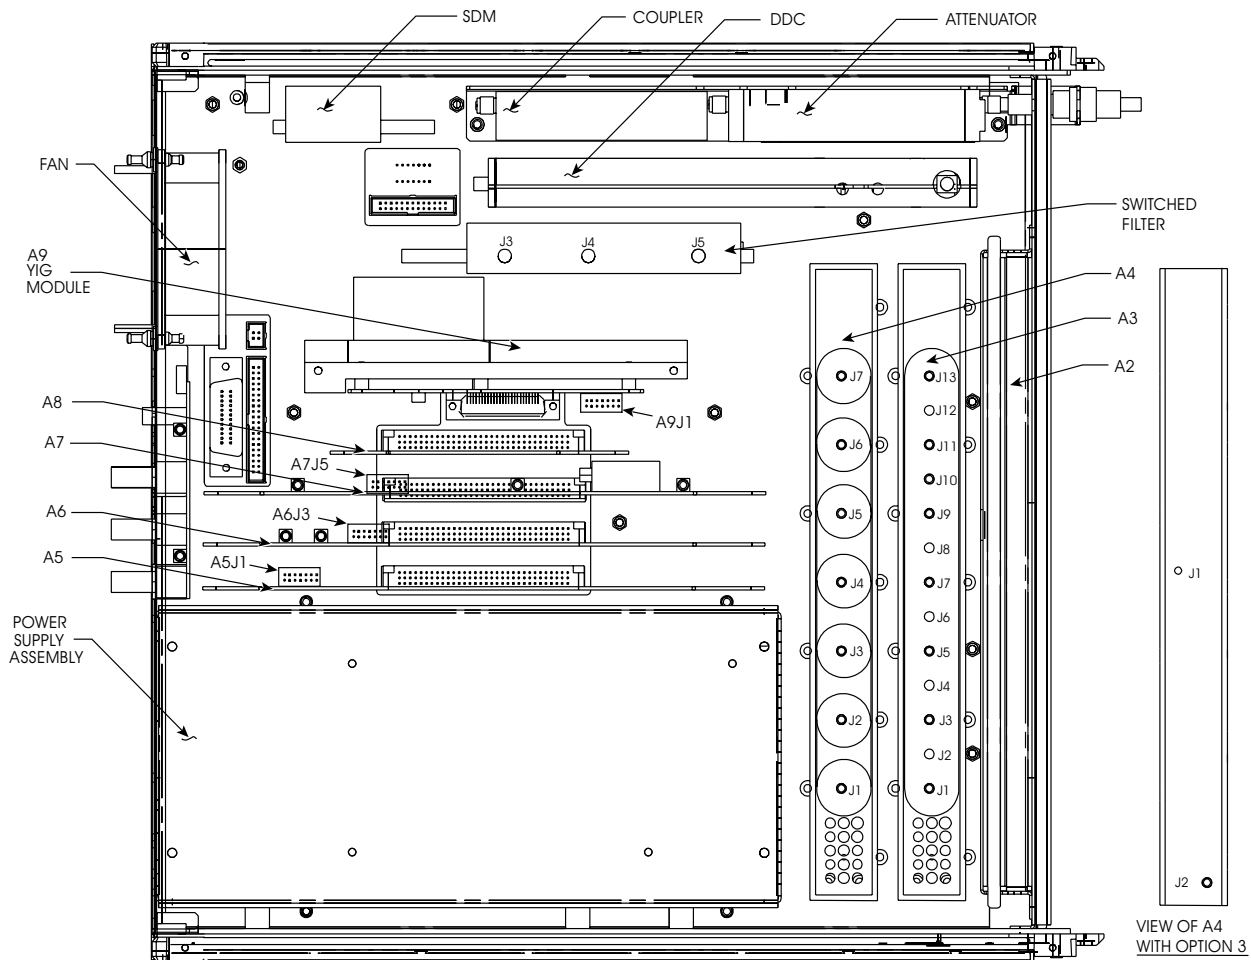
Locations of A5, A6, A7, A8, and A9 PCB Assemblies
